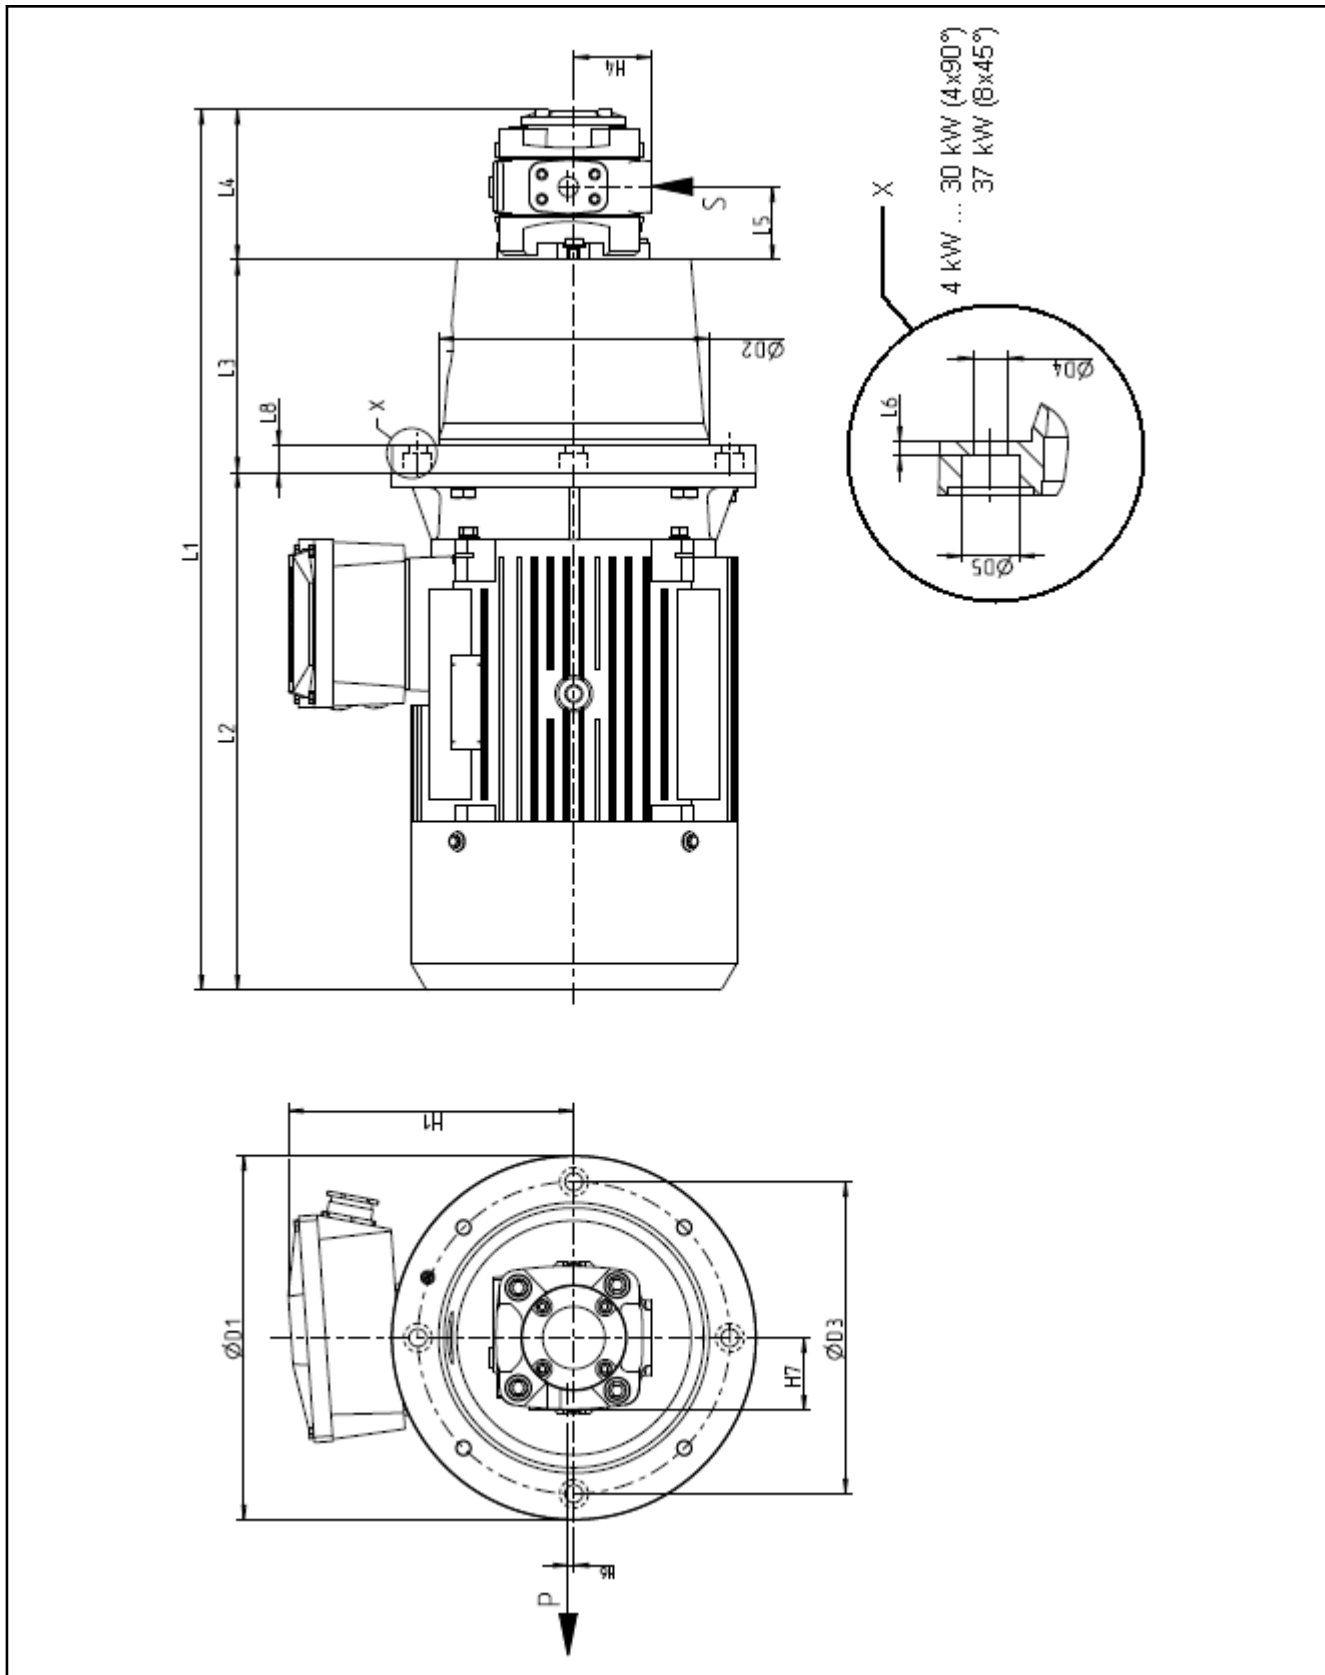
Dimension sheet "MPES2" with "PGH4" in the fastening mode "V" (vertical flange fastening, without foot)
